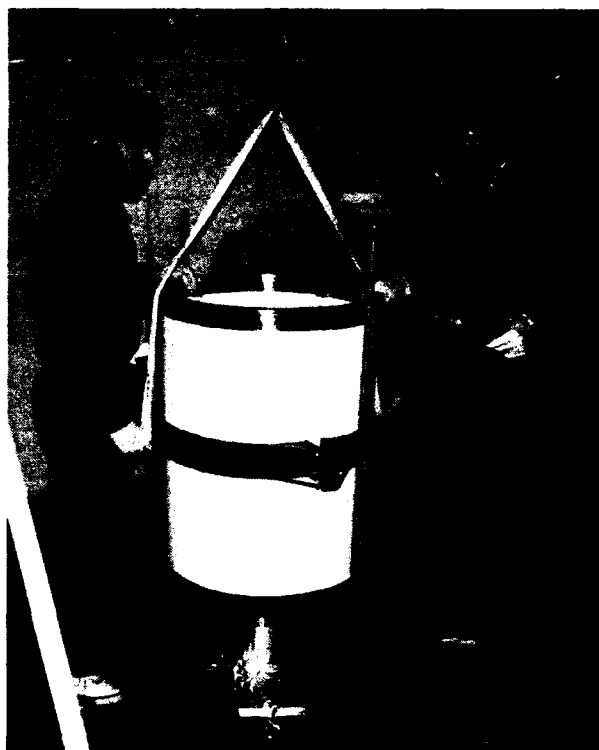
Epoxy bonding of central stiffening joint ring to first cylinder bay.
